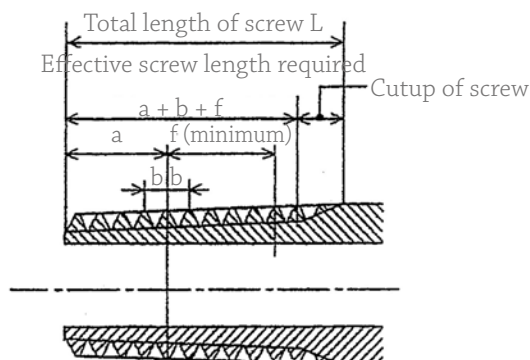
Checking the screw with a taper screw ring gauge
